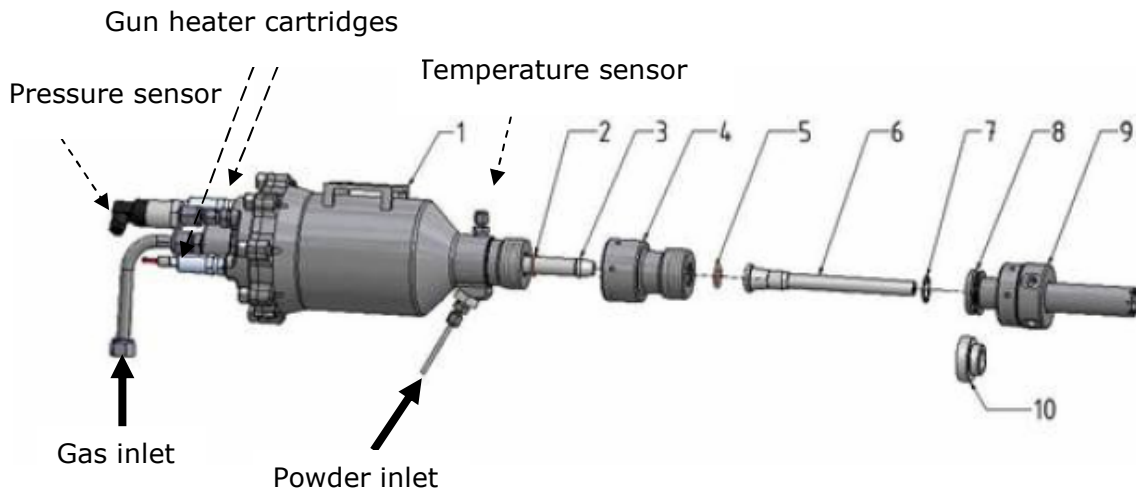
Assembly view of CGT cold spray gun showing all the components and location of sensors
